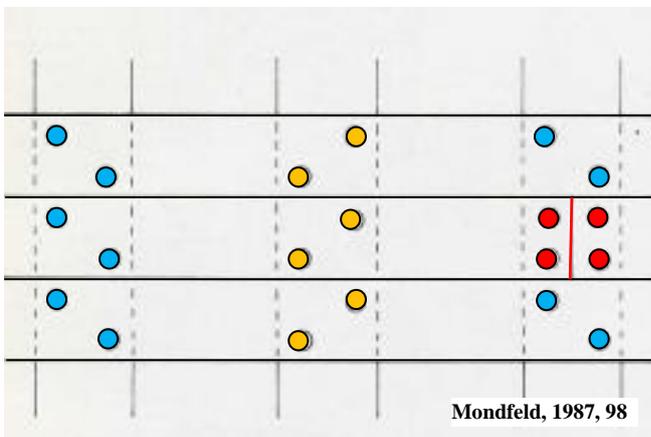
Treenailing 11 inch (4 mm at 1:72) Planks
